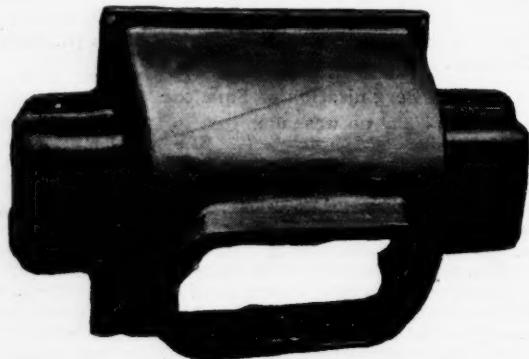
SAME CASTING AS ABOVE, AFTER REPAIR BY WELDING.
